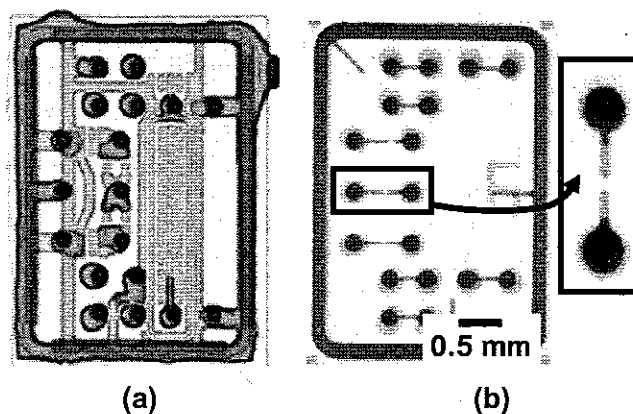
X-ray micrographs of bonds formed with (a) Sn/Ag/Cu solder and (b) Au/Sn solder. The solder is deposited on both the pads and the interconnect. The Sn/Ag/Cu squeezed out significantly more than the Au/Sn solder.
